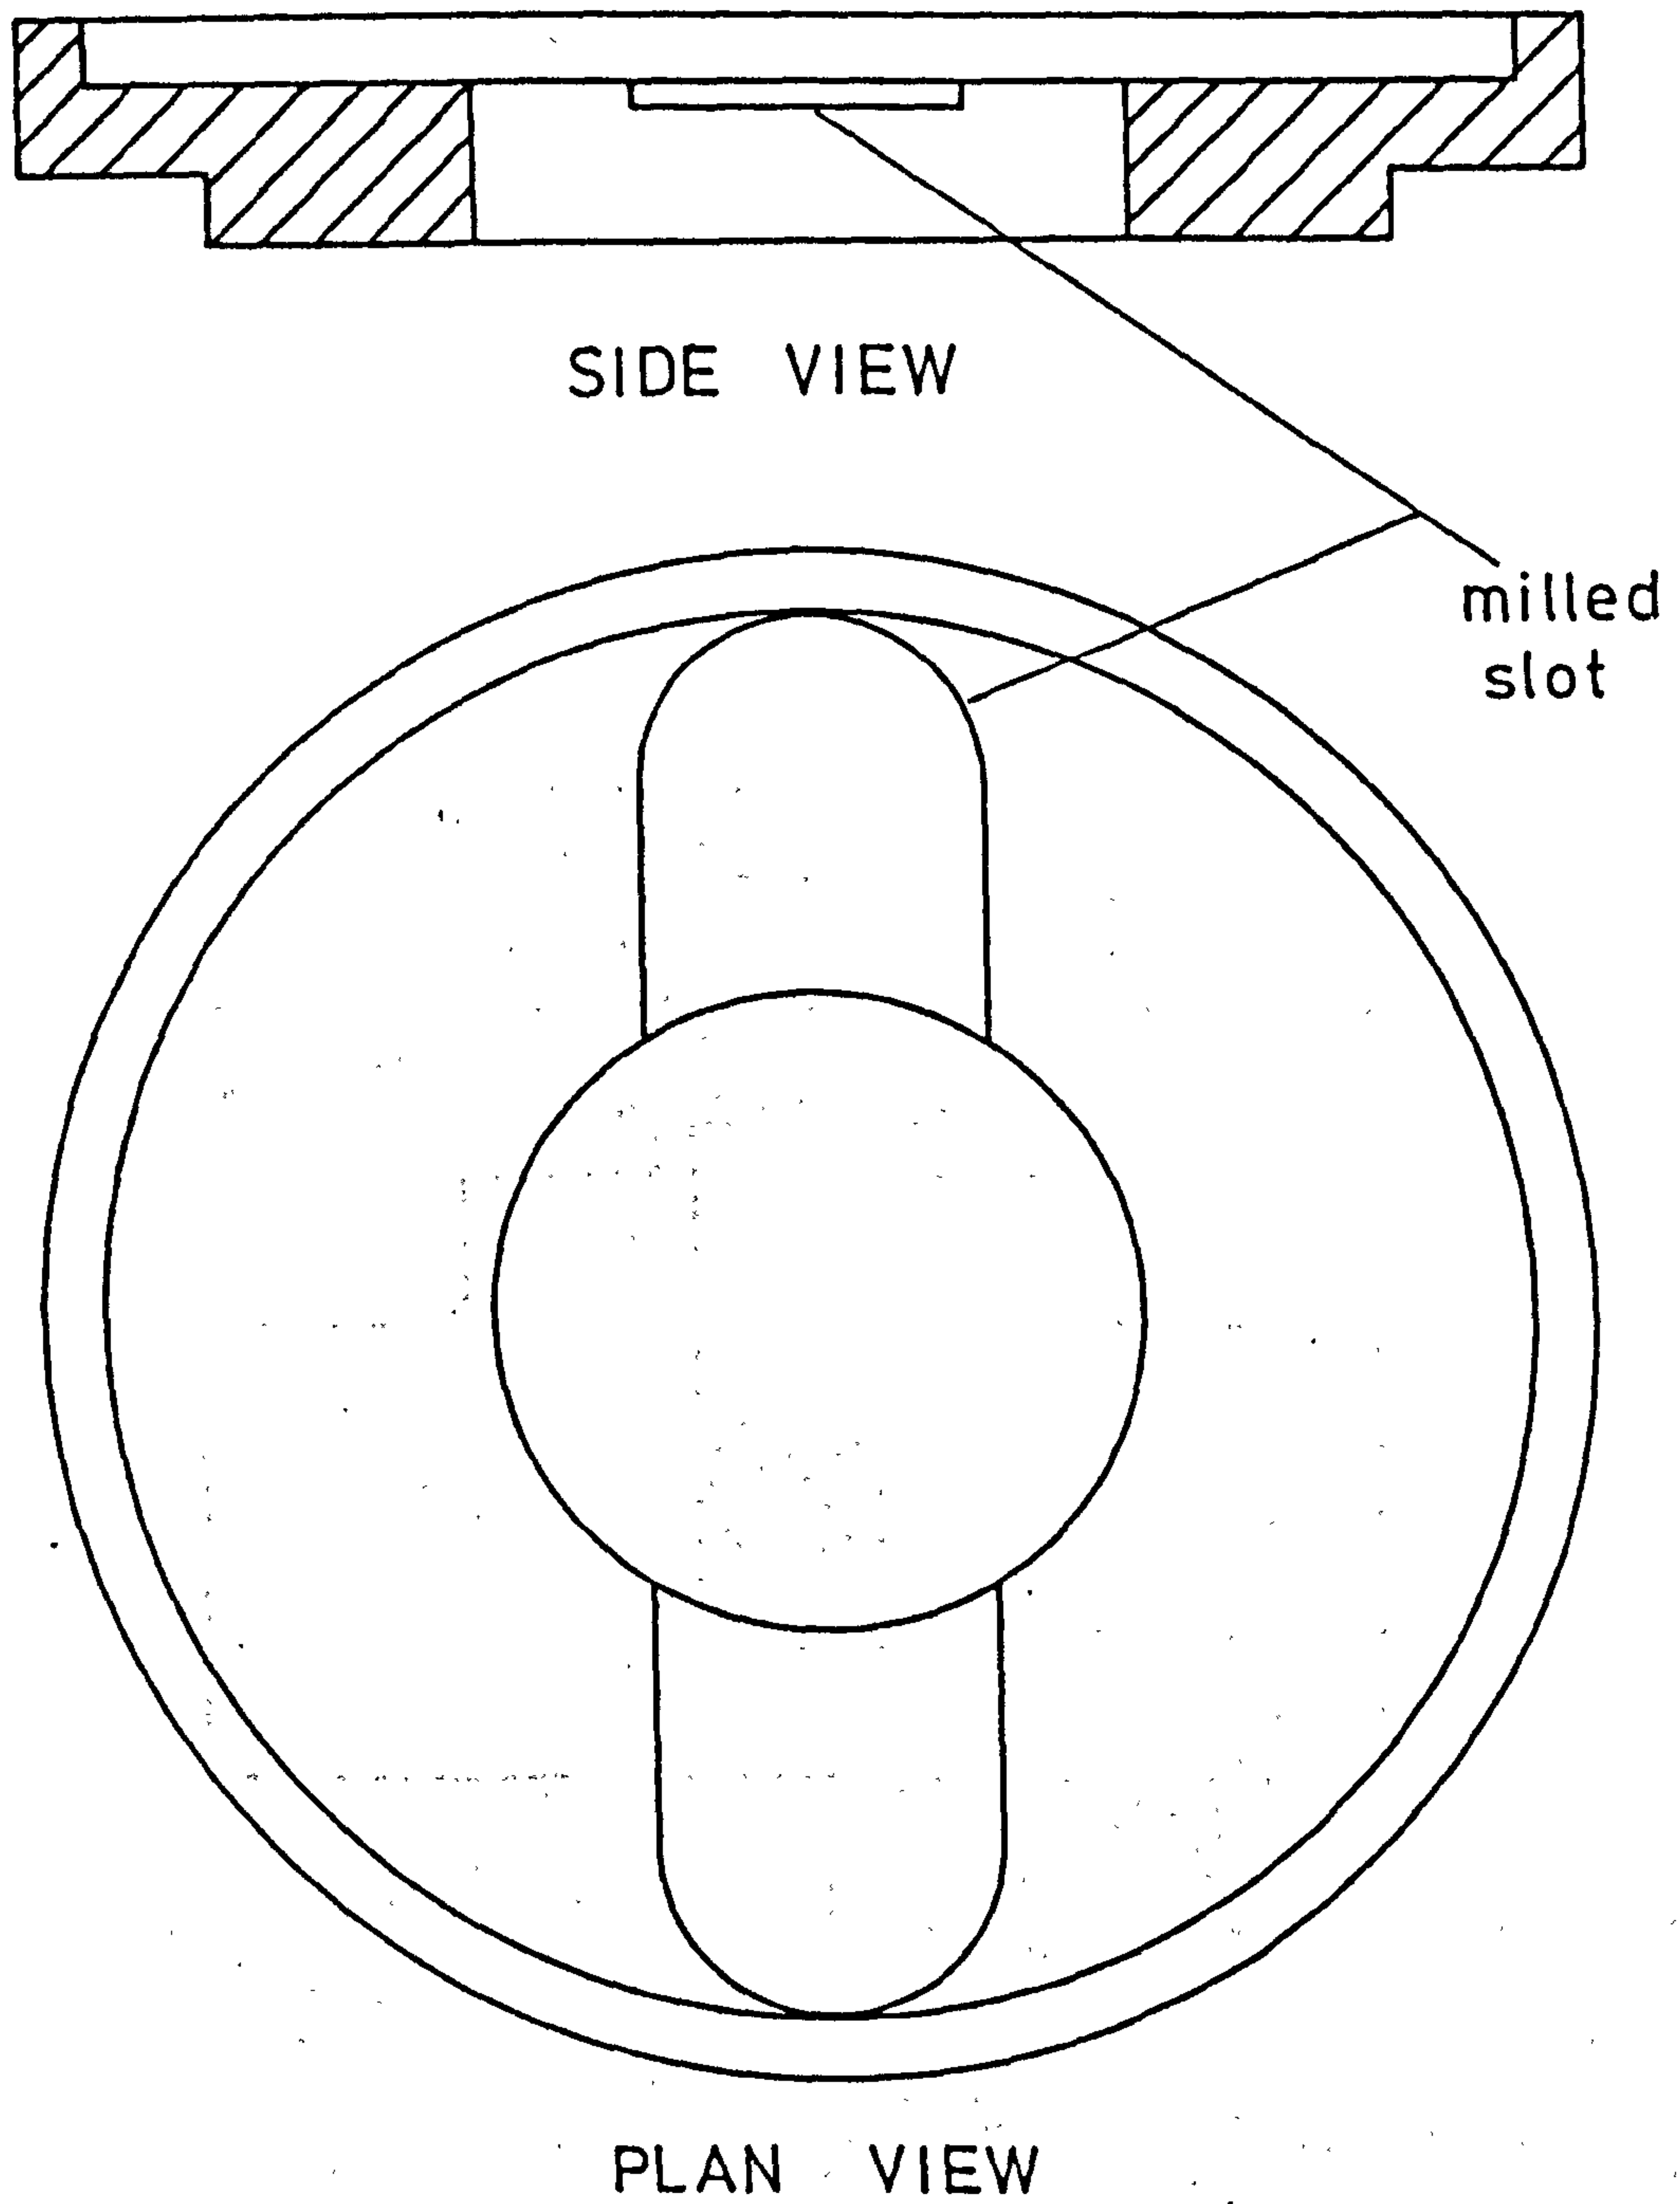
Bolometer mount holder used for cold-welding leads to the substrate.
